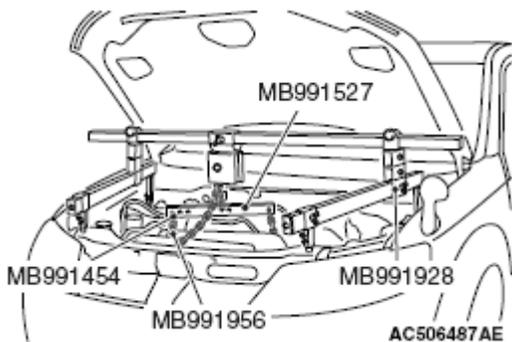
Identifying Special Tool Engine Hanger (MB991928 Or MB991956)
